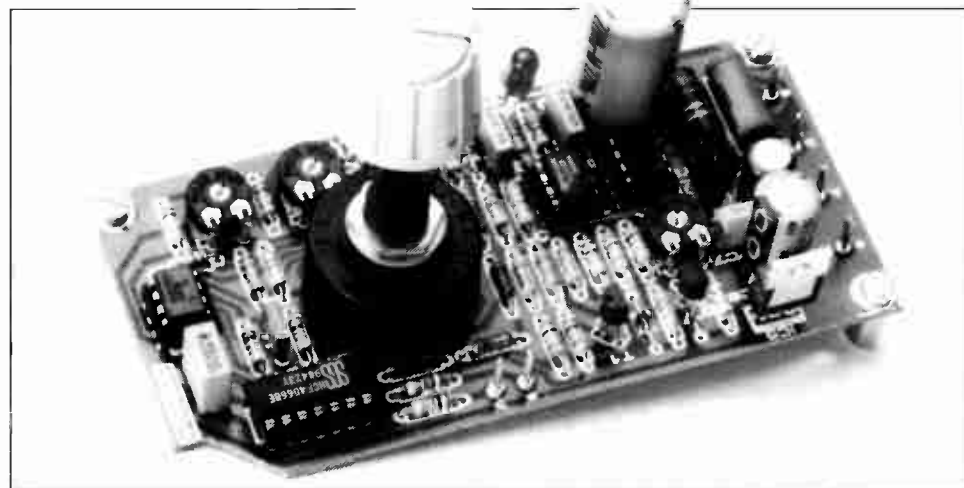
Completed circuit board, ready for fitting into the enclosure. Note that the left-hand bottom corner of the PCB is cut off diagonally.
